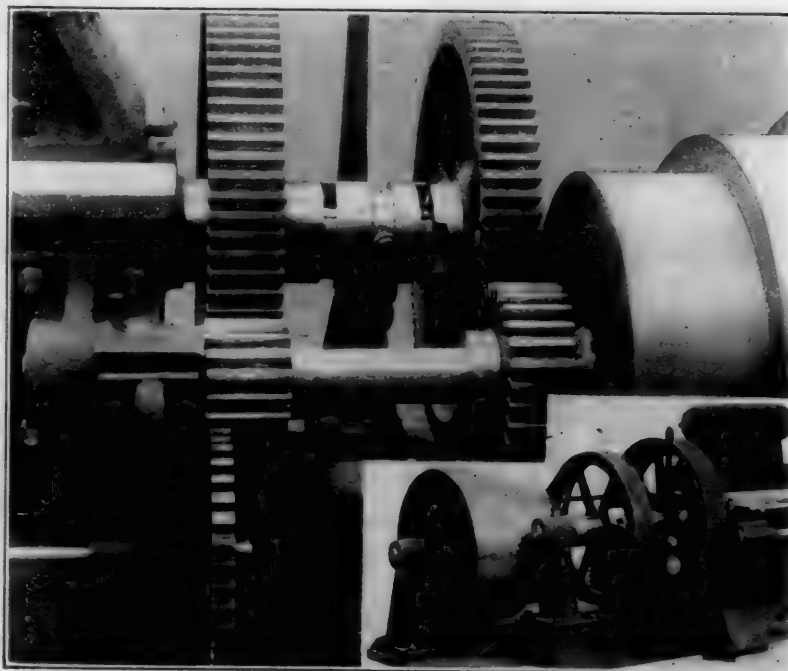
DETAILS OF BELT DRIVE FOR AXLE LATHE.
